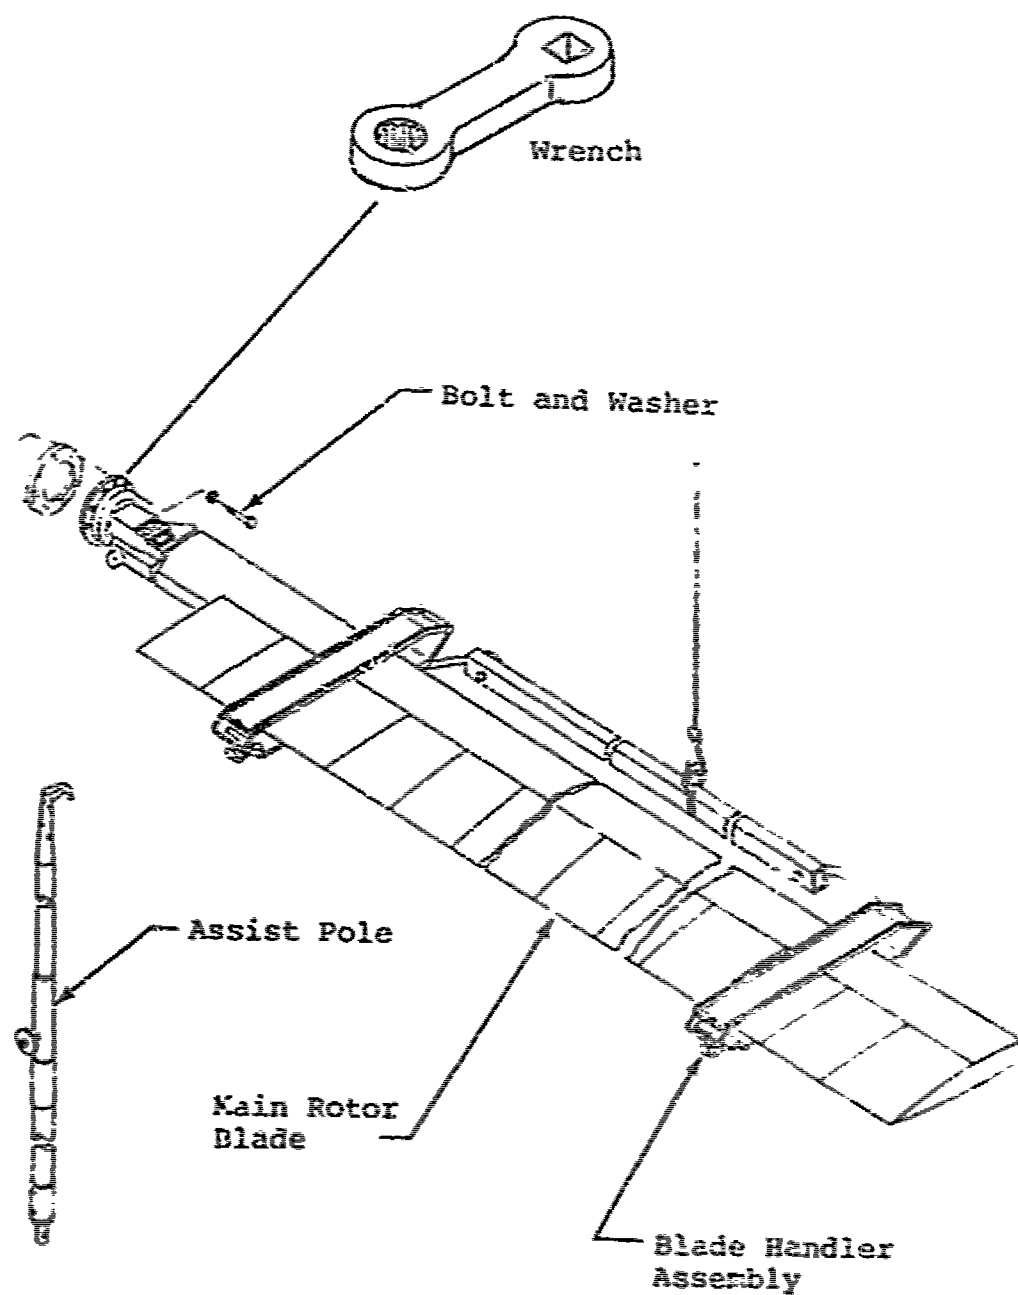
Main Rotor Blade Removal, CH-54 Helicopter.
